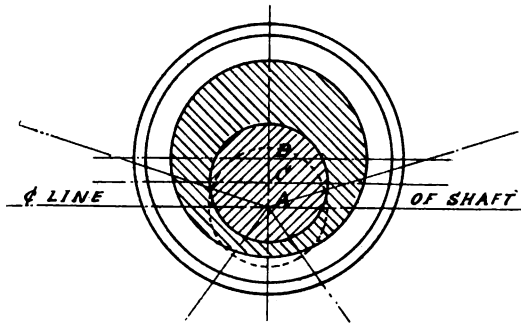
CROSS-SECTION THROUGH CRANK PIN OF THE PUMP
